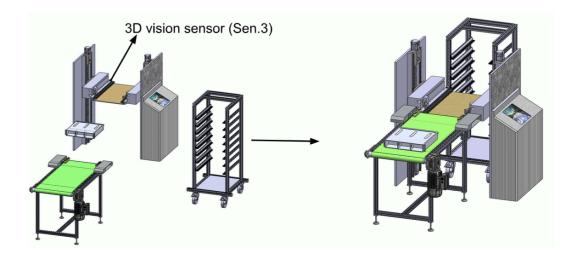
Exploded and Collapsed View of Final CLM Assembly
